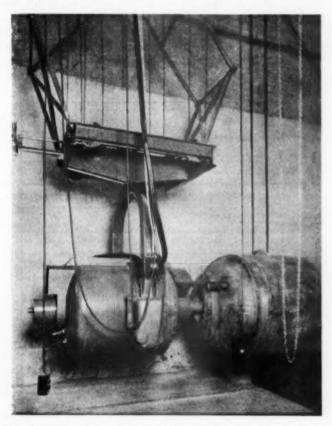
The million-volt machine at Chattanooga in position to radiograph circumferential seam from inside of drum; note the flexible arrangement of the mounting
